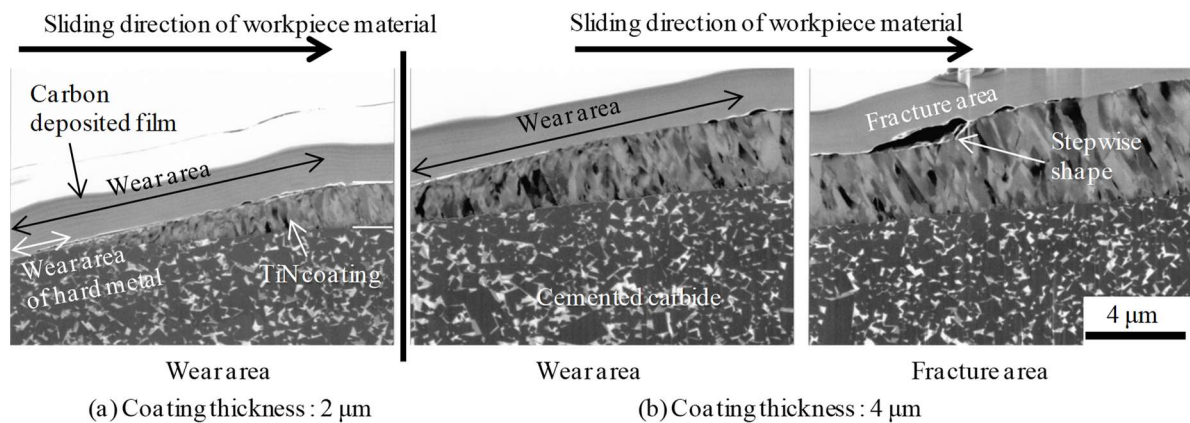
Cross-sectional SIM images at wear or fracture area on the cutting edge after machining of Alloy 718. The observation area corresponds to the area shown in Fig. 5.5.
